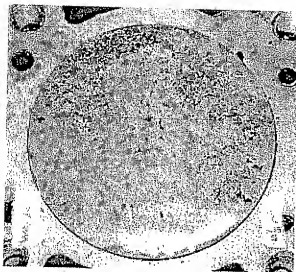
Piston top (Cylinder #4) at the end of Test #23 after water had been sprayed and deposits removed by blowing.
